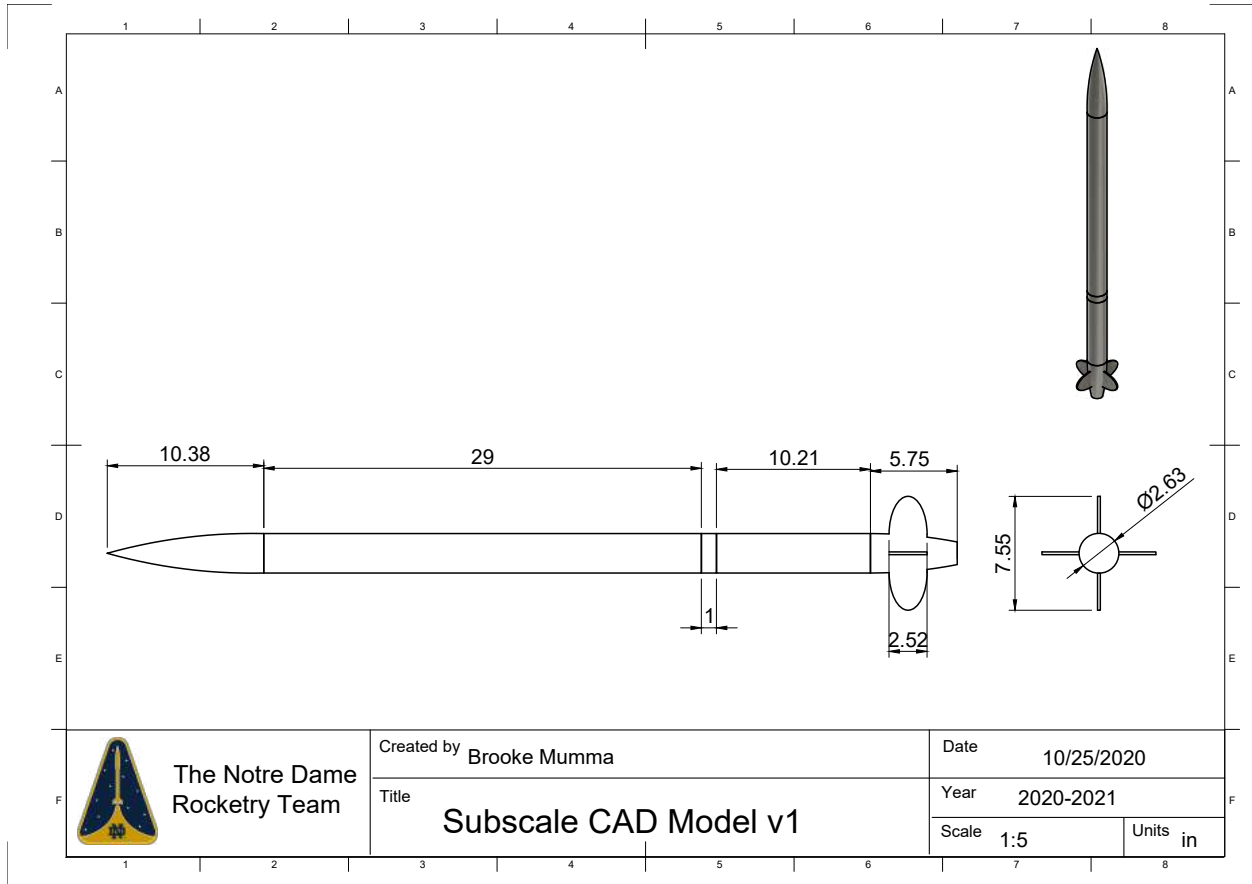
CAD drawing of the subscale launch vehicle with dimensions
